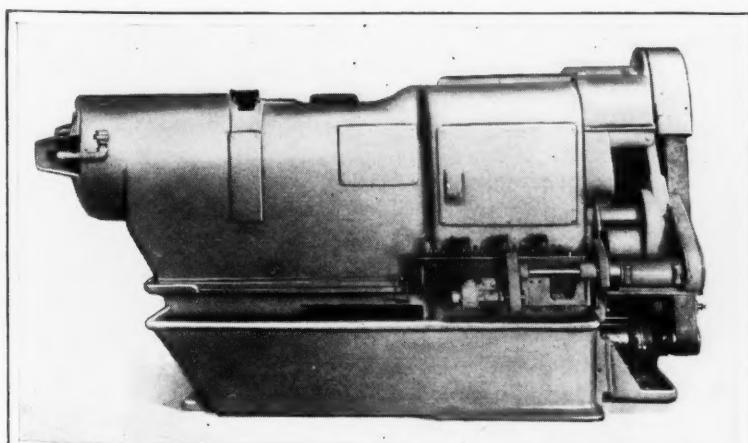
Rear View of Automatic Chucking Machine, Showing Forced-feed Oiling Arrangement and Pumps
